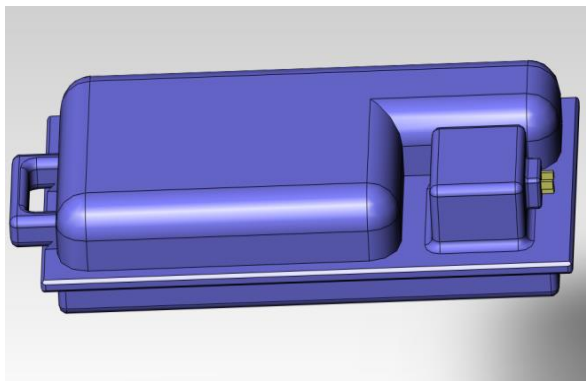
shows an OEM drawer container is used for carrying 24V 50Ah batteries. The power socket is placed at the front of the slider. When someone pushes the drawer, it will slide to the end of the trail and be plugged into the stock. A pair of lockers located at the end of the slide trail to keep the container in position. With this mechanism, the batteries became an independent module which can be replaced quickly and easily.
